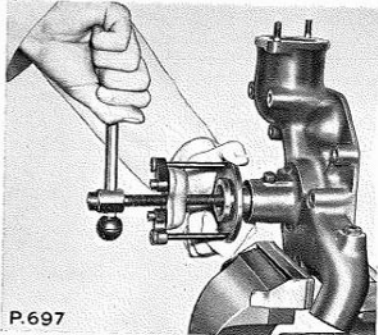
Withdrawing the fan mounting flange, using the Churchill Tool 155, in conjunction with the adaptor set R.G.155-6
